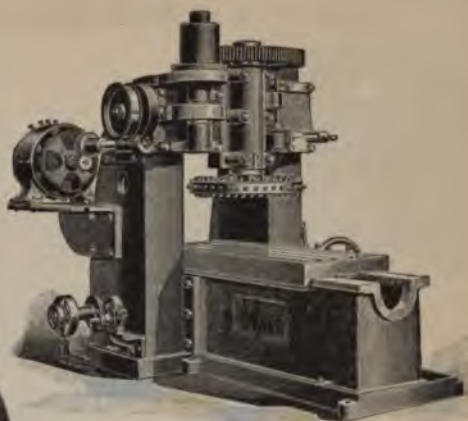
SHOWS MOTOR DRIVEN MACHINE.
